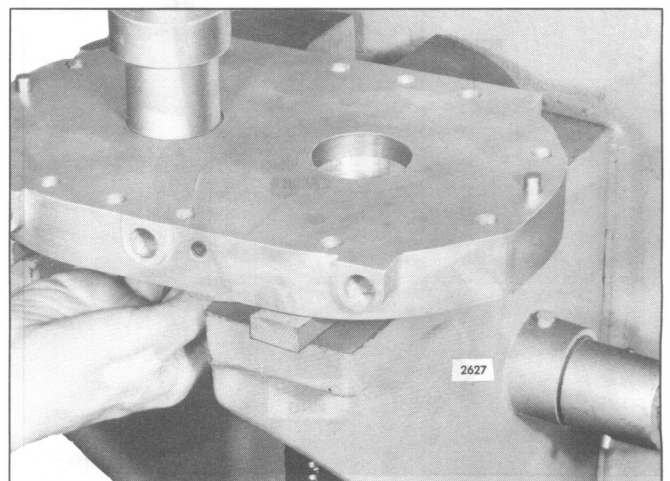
Removing Oil Seal (or Oil Seal Ring Collar) and Bearing from End Plate with Tool J 6270-3
